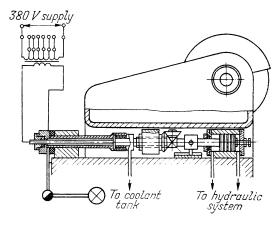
A thermal-expansion drive in a grinder for wheelhead infeed
